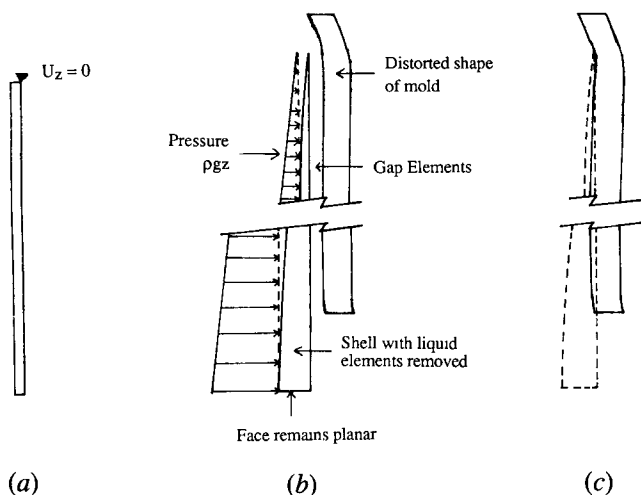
(a) Upper corner of mold constrained, corresponding to clamping on mold table. (b) Juxtaposition of distorted mold and shell in its original location, showing ferrostatic head boundary condition. (c) Distorted mold and shell in its corrected reference configuration.
